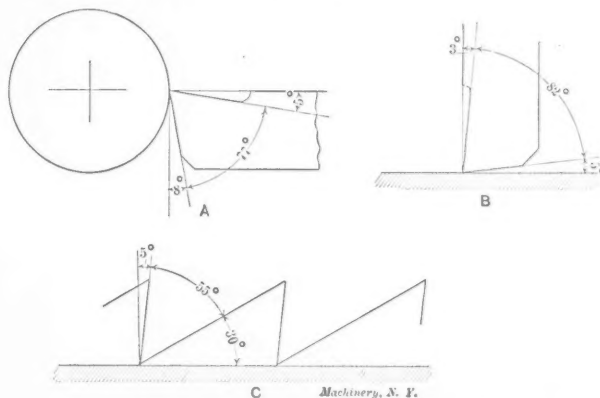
Cutting Angles of Planer Tool, Lathe Tool and File.
